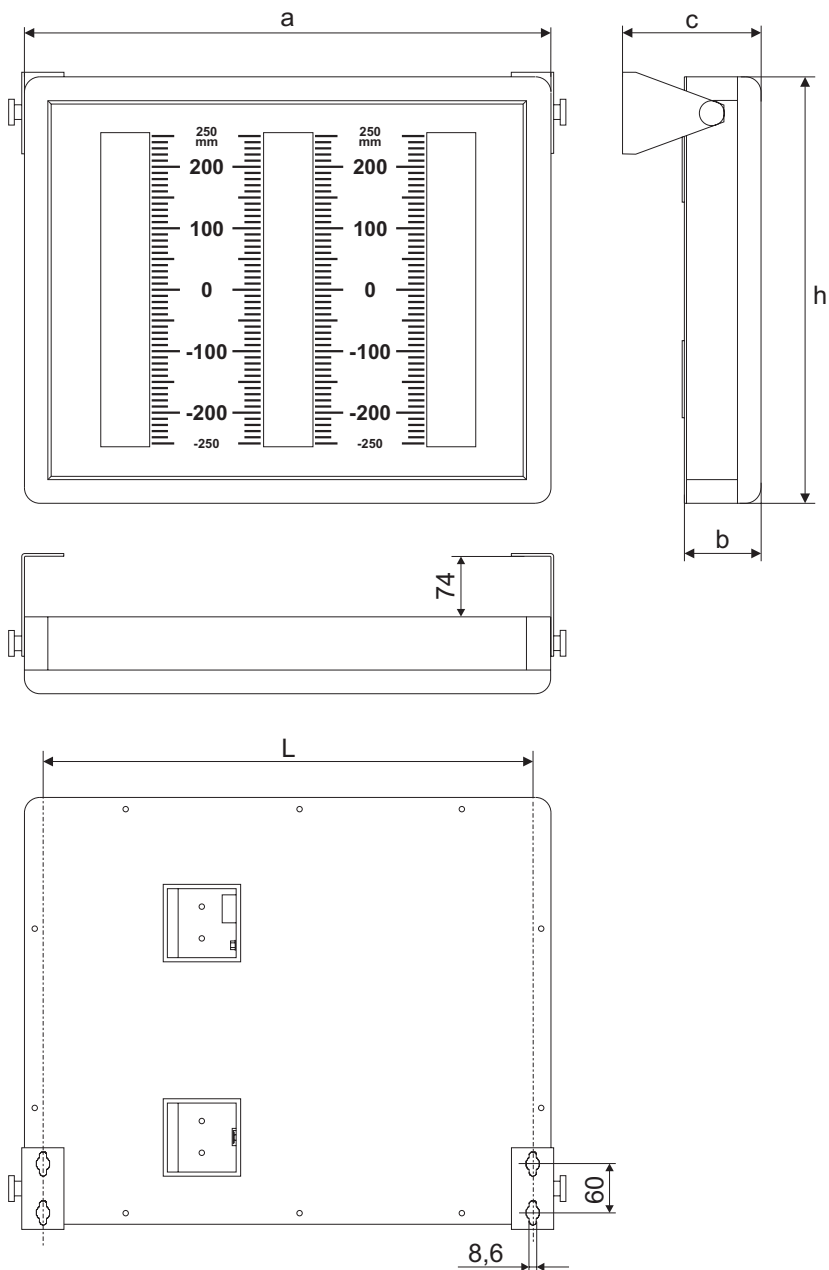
Panel dimensions, holes and fixing holder arrangement
